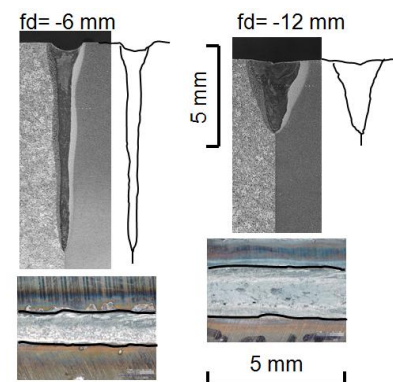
Metallographic cuts, bead photographs fd= -6, -12 mm
